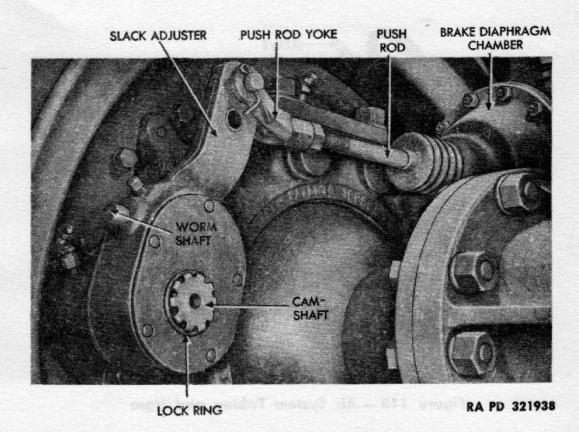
Front Brake Diaphragm Chamber and Slack Adjuster Installed
